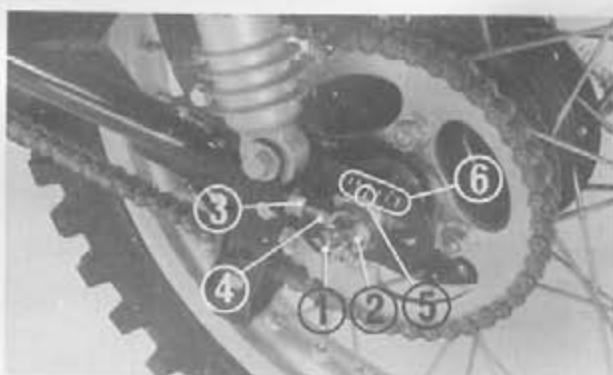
(1) Cotter pin (2) Rear axle nut (3) Lock nut (4) Adjusting bolt (5) Index mark (6) Reference mark
